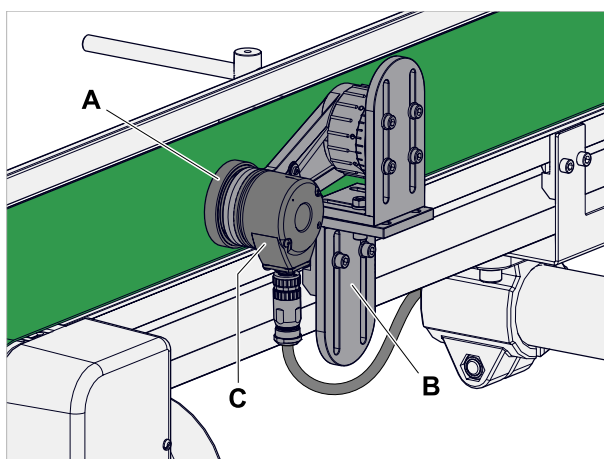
Novexx encoder (C) with measuring wheel (A) and bracket (B) for mounting on a Novexx Solutions conveyor belt.
